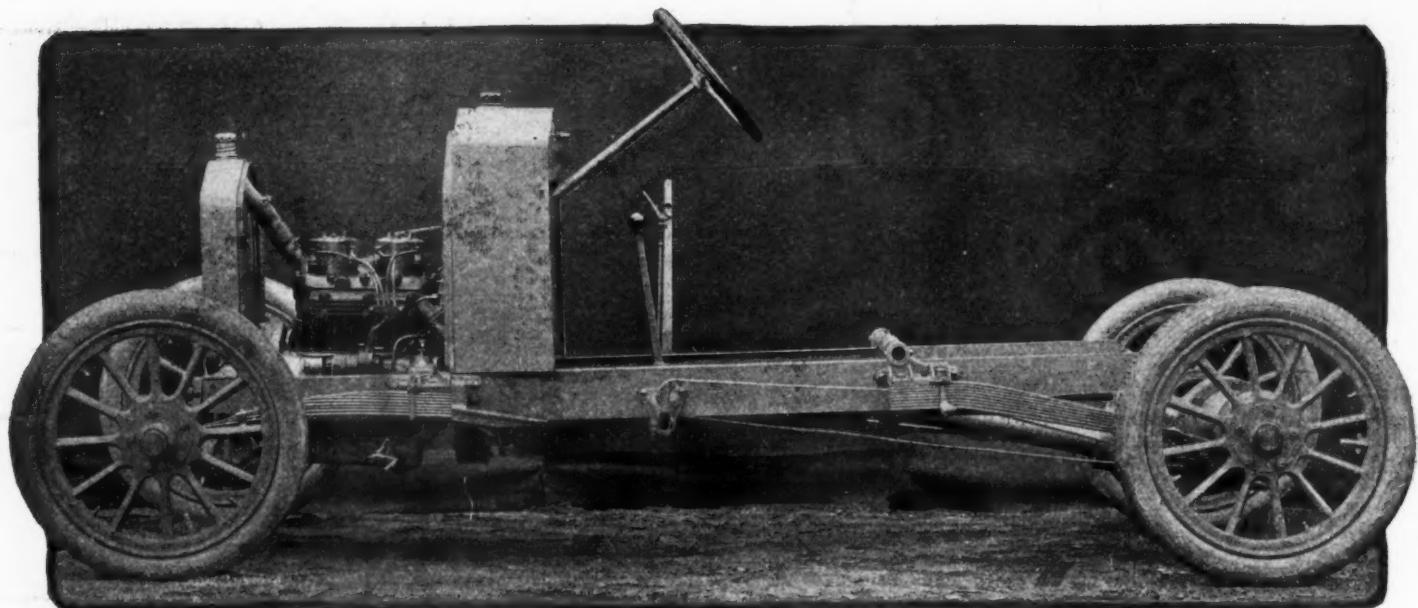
Chassis of Wolseley Stellite car with cylinders 27.16 x 31.2 inches. Wheelbase 96 inches, tread 46 inches. Frame wood sill with steel flitch plates
